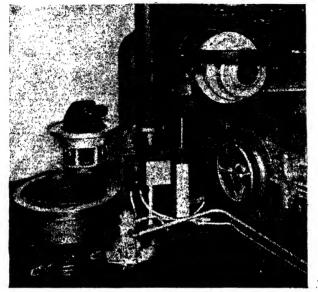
Carrier and cylinder are in place on the grinder. The lifting arm is swung free ready to return.
